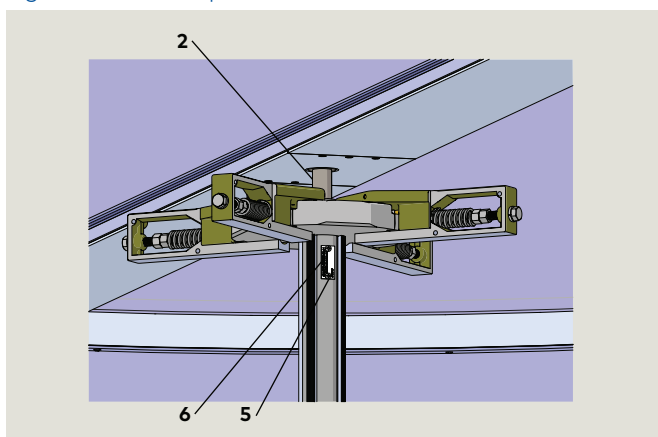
6-32 x 1/2" Phillips pan head screw
